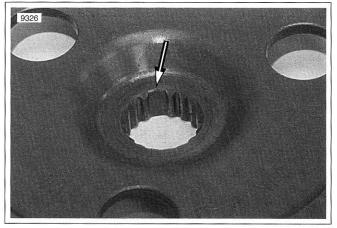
Counterbalancer Gear Master Tooth Flat
